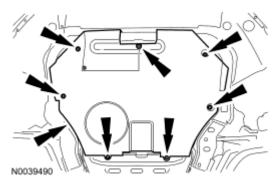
Locating Splash Shield Bolts Courtesy of FORD MOTOR CO.
